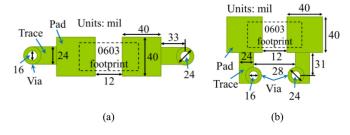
Dimensions of the (a) straight; (b) *L*-shaped layouts [31].
